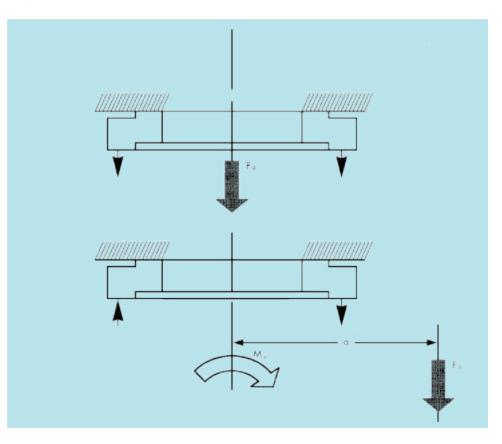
Large antifriction bearings are generally installed supported on the lower companion structure.
